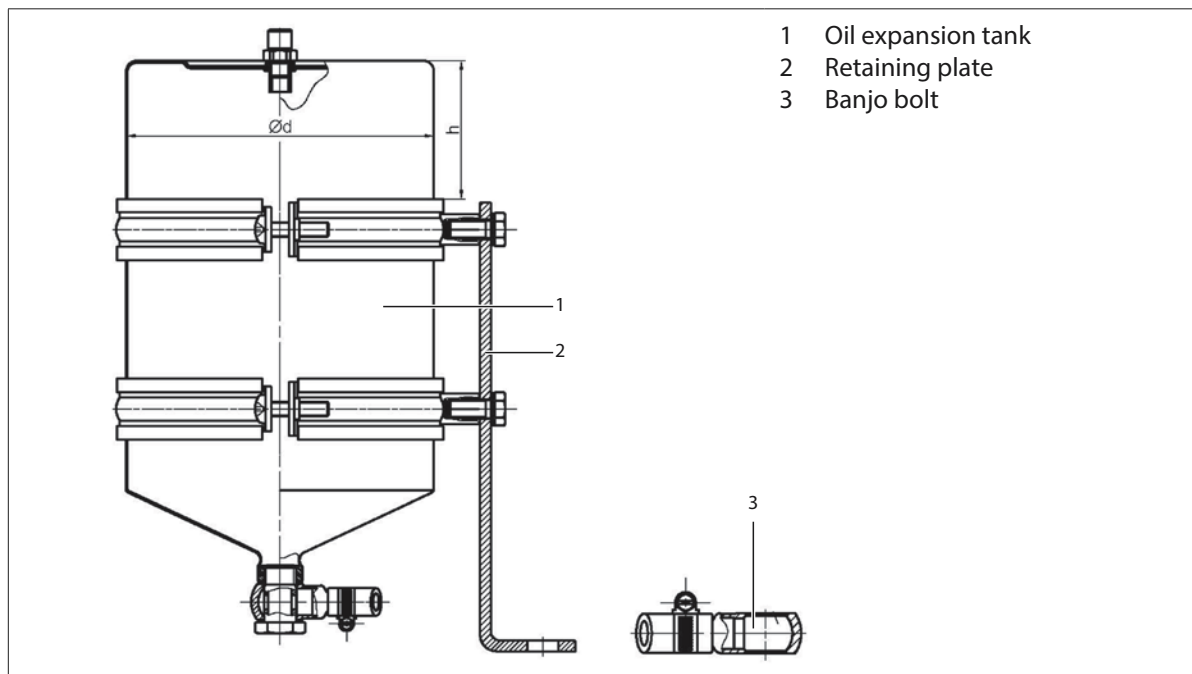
Accessory set, Part 1: Oil expansion tank unit with retaining plate
